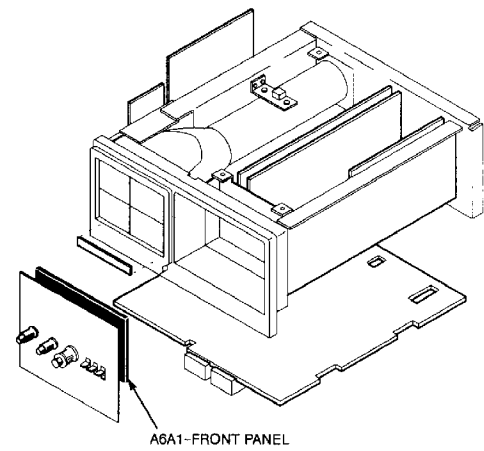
A6A1 Front Panel Board Component Locator.
